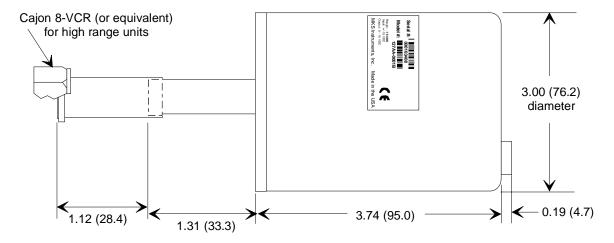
Dimensions of a High Range Type 127/128 Transducer
